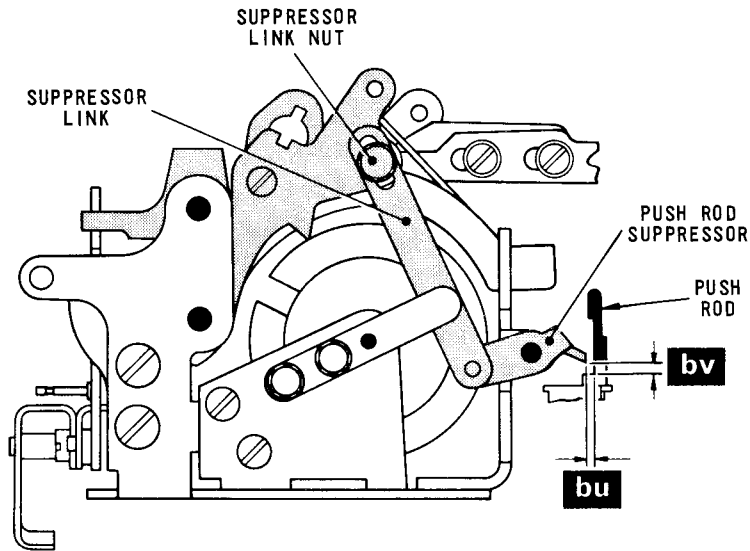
PUSH ROD SUPPRESSOR/PUSH ROD CLEARANCES
